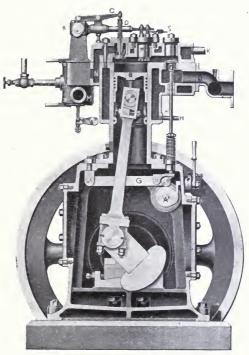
Westinghouse Vertical Gas Engine, Medium Size,
